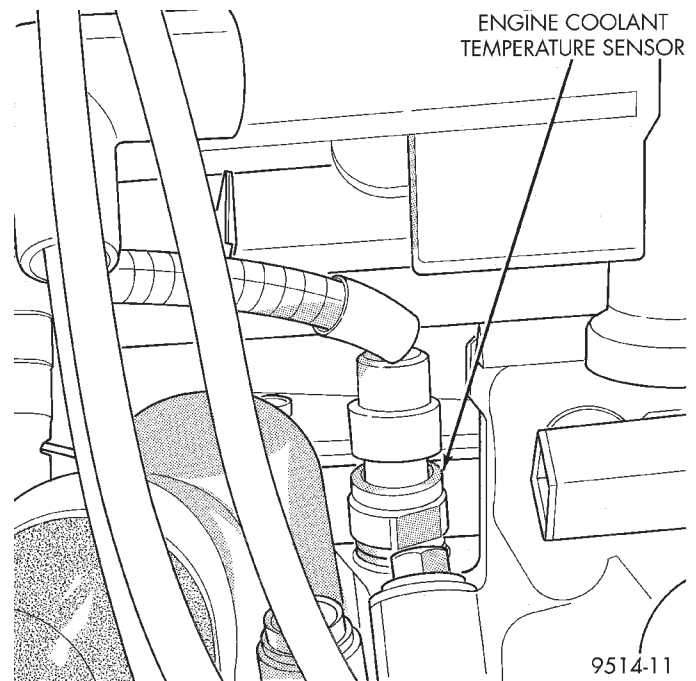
Engine Coolant Temperature Sensor—3.3/3.8L
